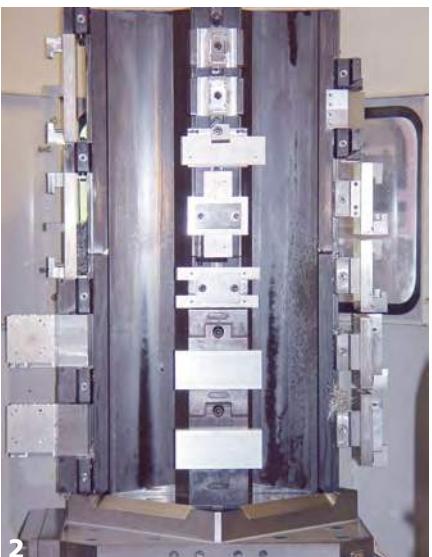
The output of a vertical machine with a fully loaded table surface is similar to that of a horizontal machine.
